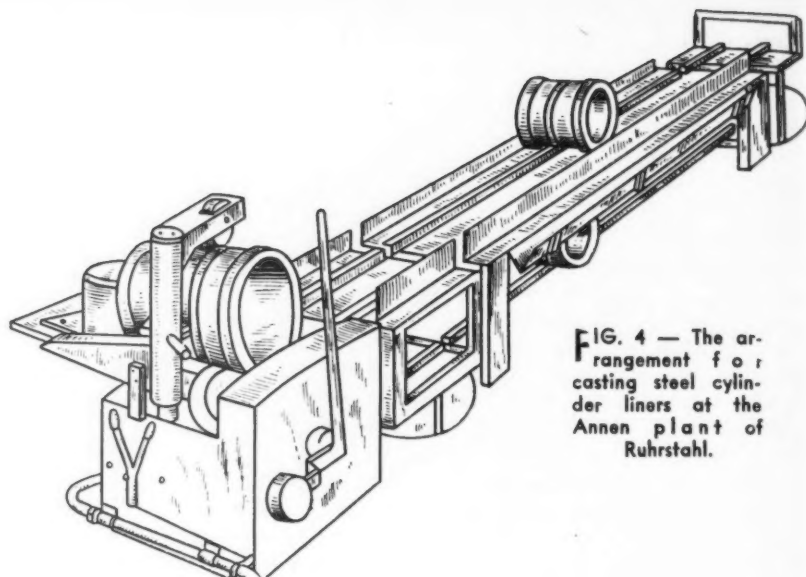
The arrangement for casting steel cylinder liners at the Annen plant of Ruhrstahl.
